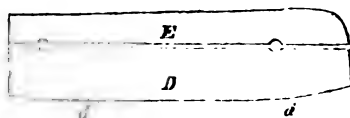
is a side view of this razor, with the blade opened a little way from the handle. Fig. 2 a back view of fig. 1. Fig. 3 a similar view to fig. 1, with the parts C, D, E, afterwards referred, to removed. Fig. 4 a side view of the parts DE. Fig. 5 a side view of the part C. Fig. 6 a transverse section of the parts B, C, D, E.
